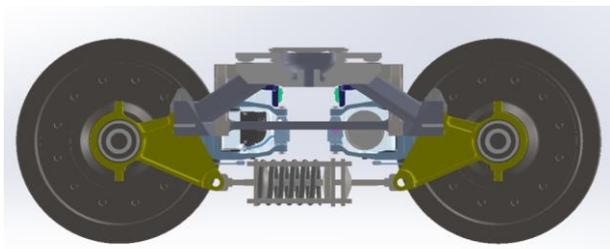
Primary suspension arrangement of the modified bogie from an inside view. One progressive coil spring is used on each side.
